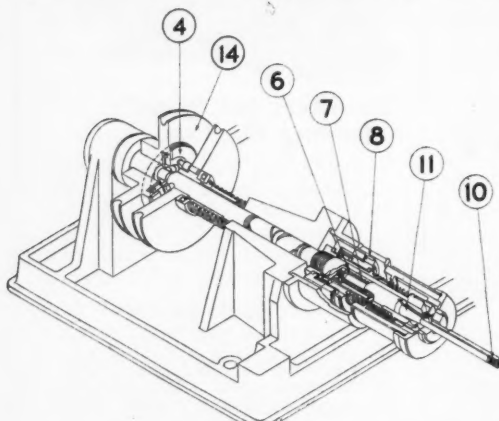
Drawing illustrating features of design of No. 1 Microhoner
